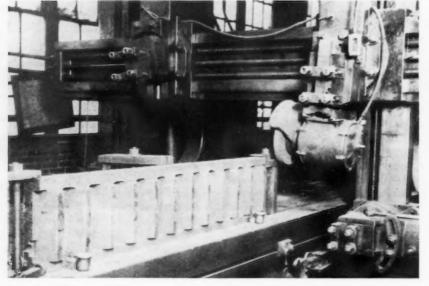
When it is necessary to grind up to shoulders on the racks, planers fitted with a grinding wheel are employed.
